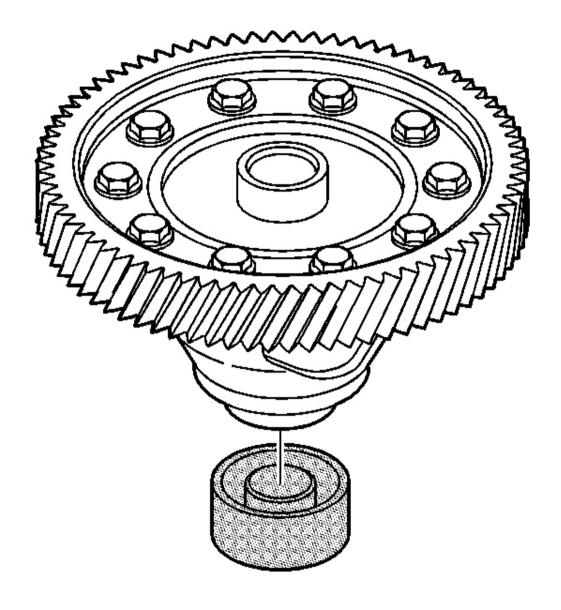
Placing Differential Assembly Onto J 44388-4 Courtesy of GENERAL MOTORS CORP.
